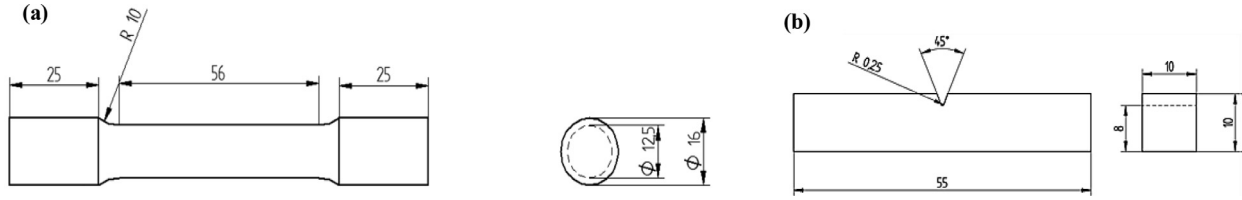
(a) Dimensions of Tensile test specimen (mm) following ASTM E8; (b) Dimensions of Impact test specimen (mm) following ASTM E23.
